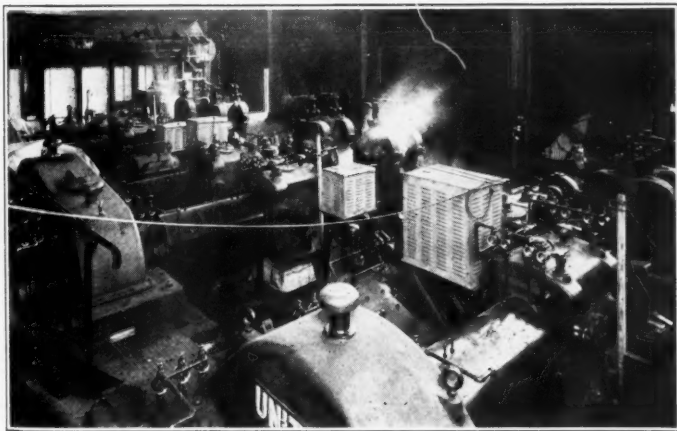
Showing a United four-high mill, equipped for pressure grease lubrication.
